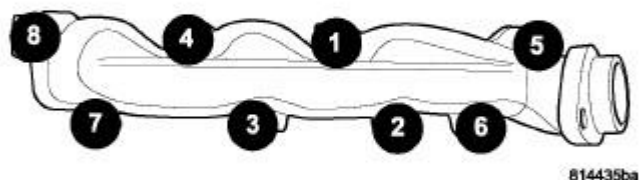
Exhaust Manifold Bolt Tightening Sequence - Left
